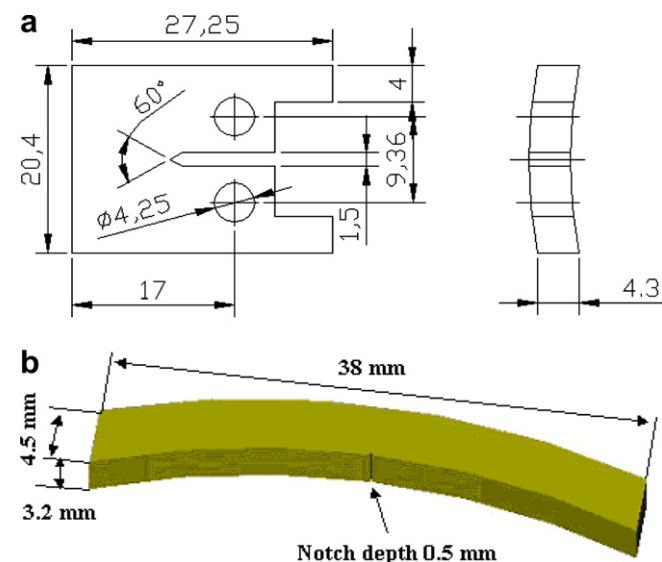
Schematic drawings of (a) 17 mm compact tension specimens and (b) 38 mm cantilever beam specimens used for the delayed hydride cracking tests in the axial and radial directions of a CANDU Zr–2.5Nb tube.
